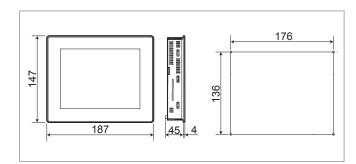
Dimensional drawing and borehole diagram for the system operator terminal (dimensions in mm)
